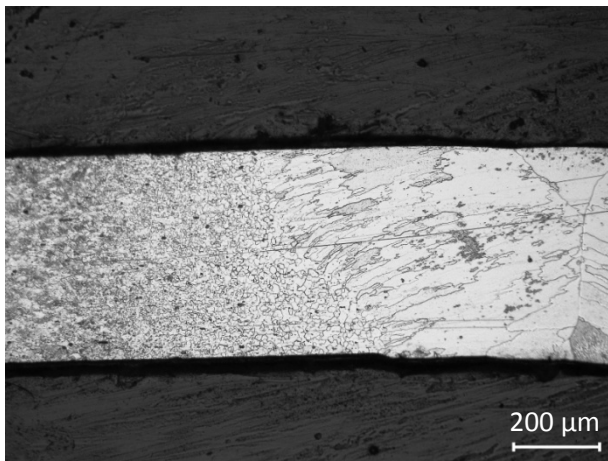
Macrograph of F-F 0.5 mm thick similar joint showing the welded zones
